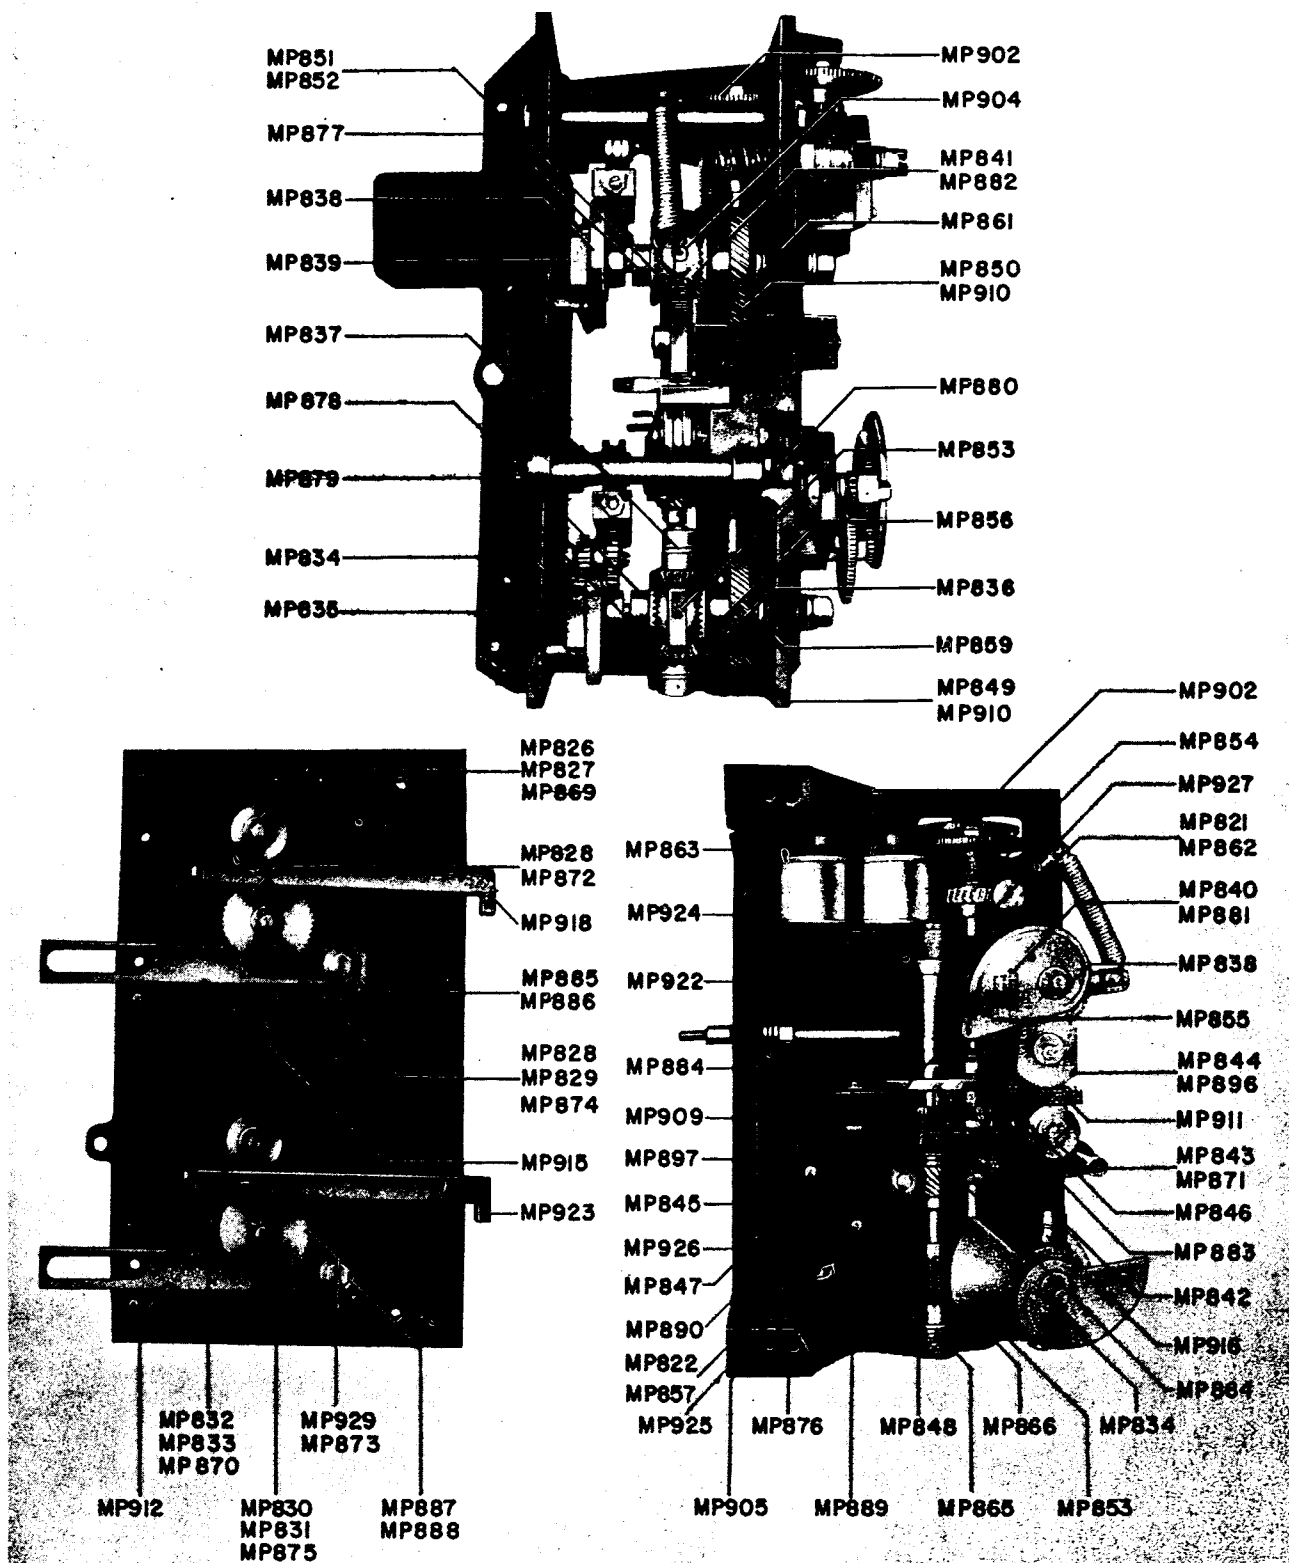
Radi Frequency Amplifier AM-2197/WRT-1, Tuning and Coupling Mechanism, Location of Internal Parts
